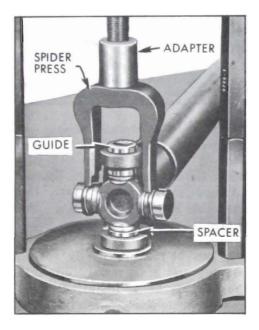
Removing Bearing with Guide and Spacer in Place
